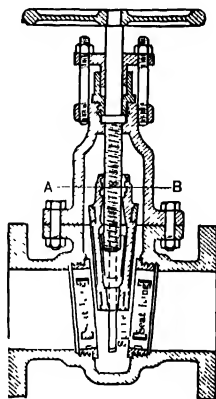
Typical Gate Valve, Solid-wedge, Bolt-top, Inside-screw.
